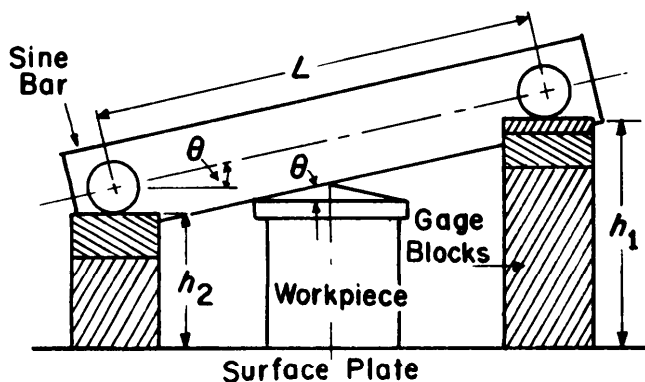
Sine Bar Setup on Gage Blocks for Measuring an Angle on a Workpiece
